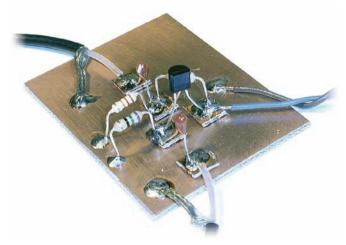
Small pads made from PCB material are used as isolated connecting points in Manhattan style construction. Pads are either soldered or glued to the PCB surface.
